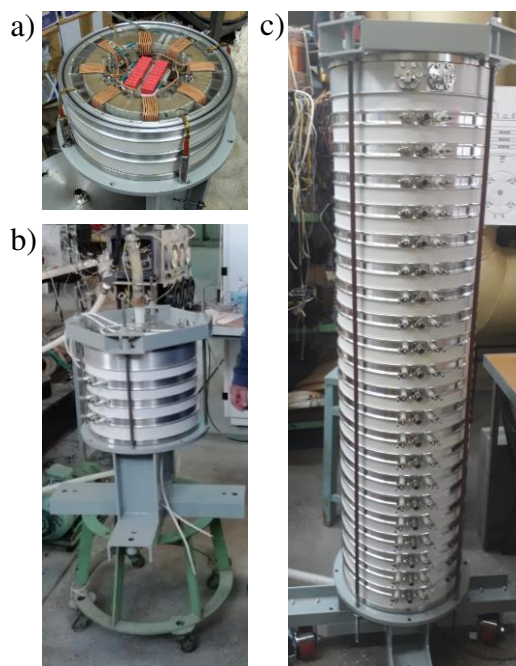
Cascade transformer production: a) transformer prototype during assembling, b) assembled prototype during tests, c) cascade transformer of the cooler.
